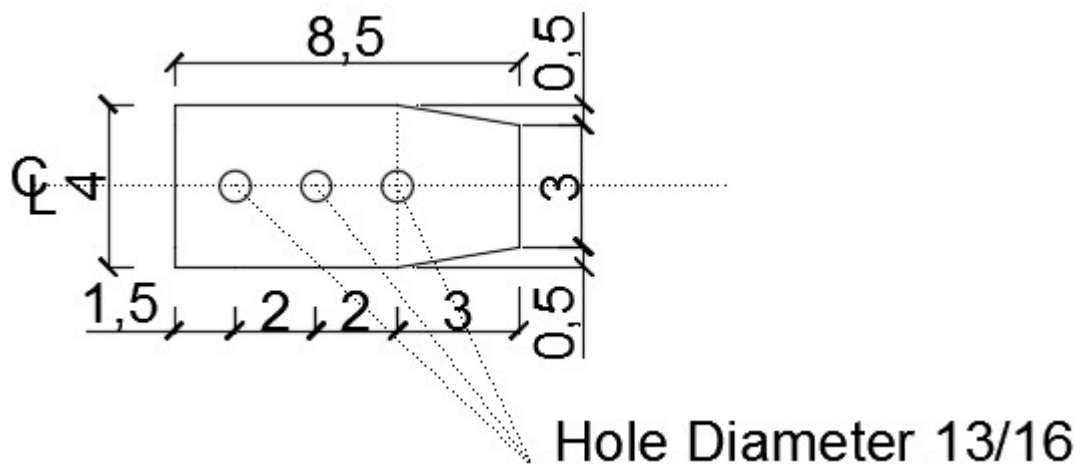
Branch plate welded to the 9.625" tube (weld on the right)
